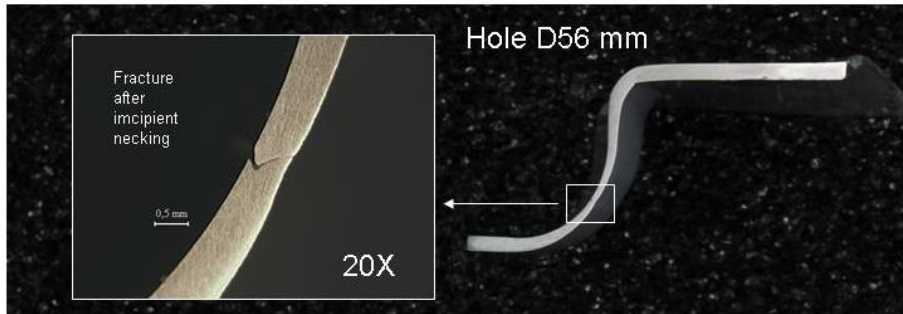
Fractography of the failure zone for $d_0 = 56$ mm pre-cut hole specimen.
